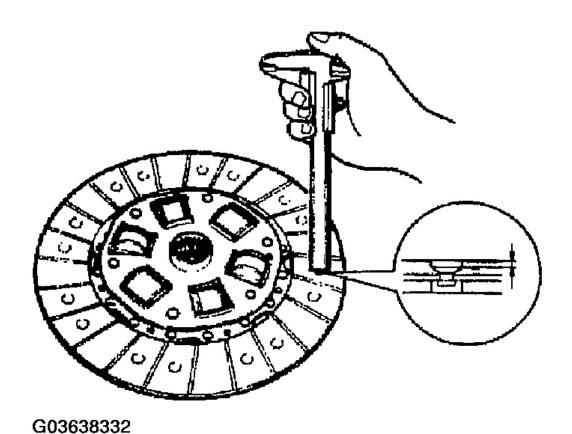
Measuring Thickness Of Lining At Rivet Head On Both Sides Using Vernier Calipers Courtesy of MAZDA MOTORS CORP.
